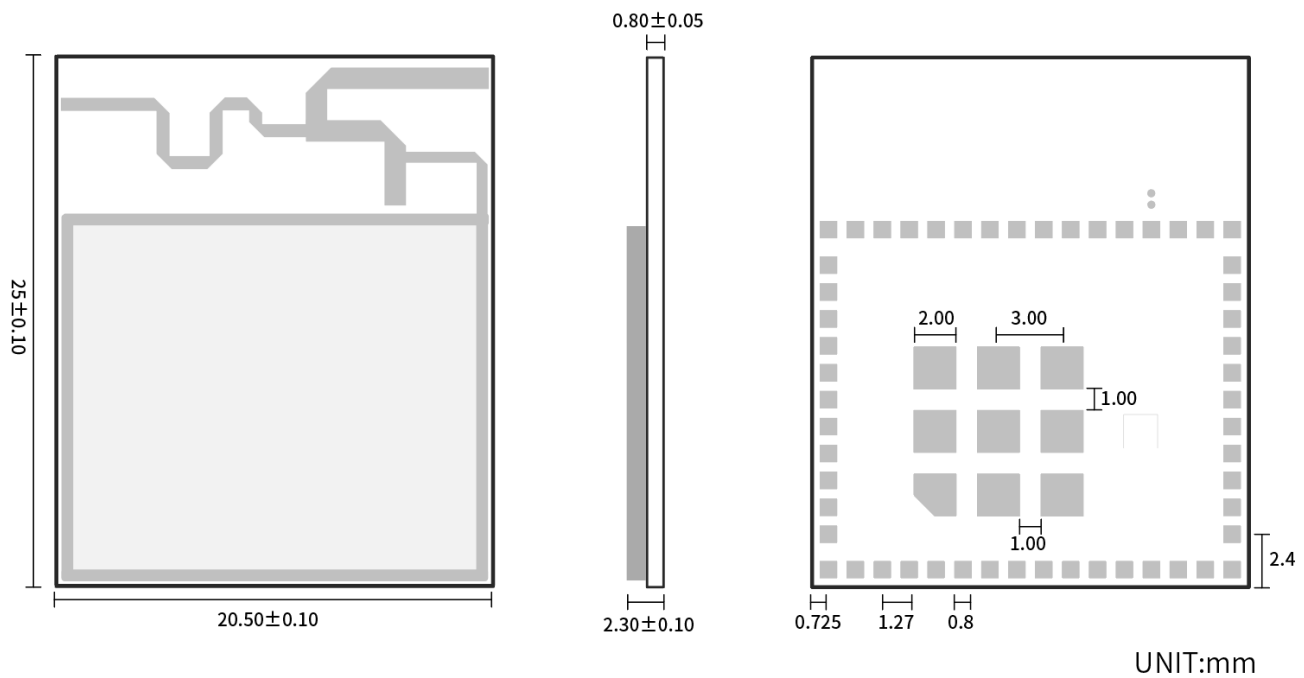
Recommended PCB Footprint of RF-WM-3235A1(S) (Top View) (mm)
